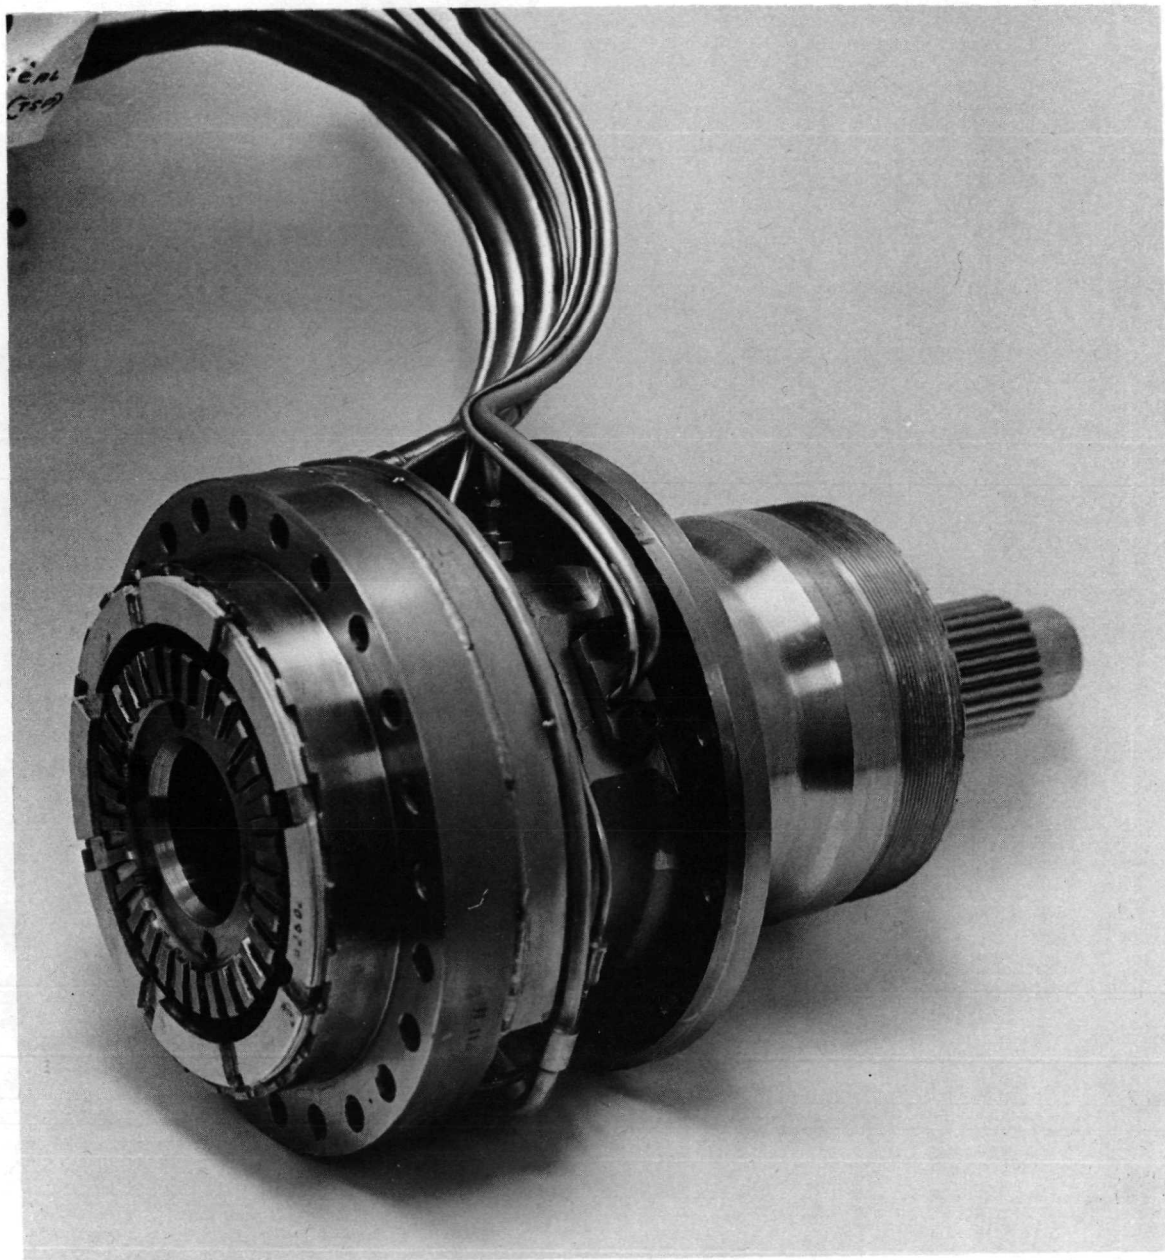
PHOTOGRAPH OF SHAFT-BEARING-SEAL ASSEMBLY
